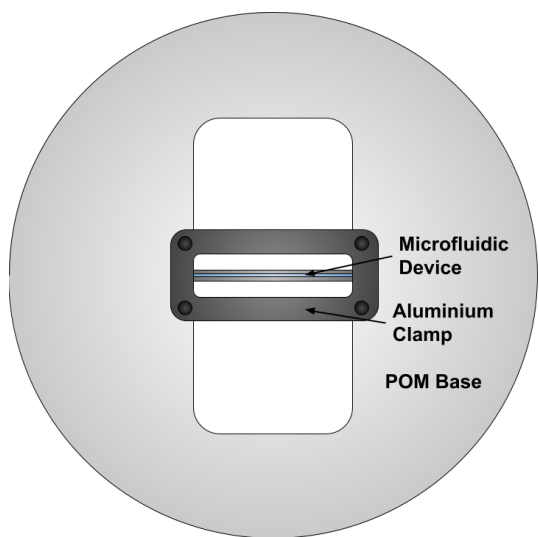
The holder is made with a Polyoxymethylene (POM) base, using CNC milling to make the details and screw sockets. The device was secured onto it using an aluminium clamp.
